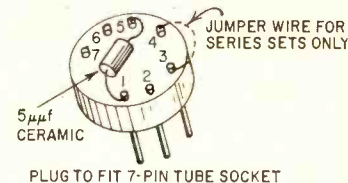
Small ceramic capacitor mounted on plug completes stage jumper.
